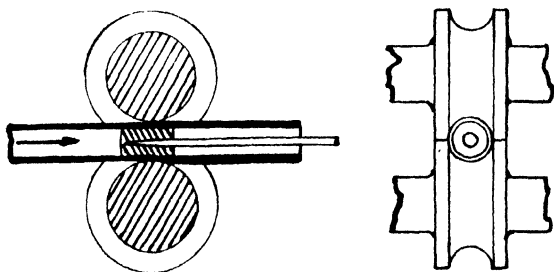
XV.—Lap-welding rolls with welding ball and bent skelp in position.
